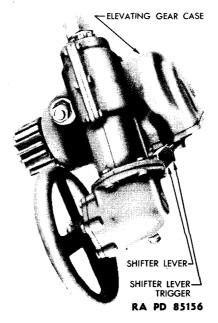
Elevating Mechanism Locking Device in Disengaged Position
